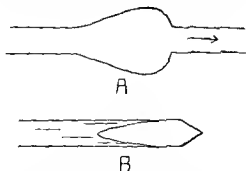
Detail of beaded wire. A. Shape of bead. B. Flattened drilling point with double cutting edge.
